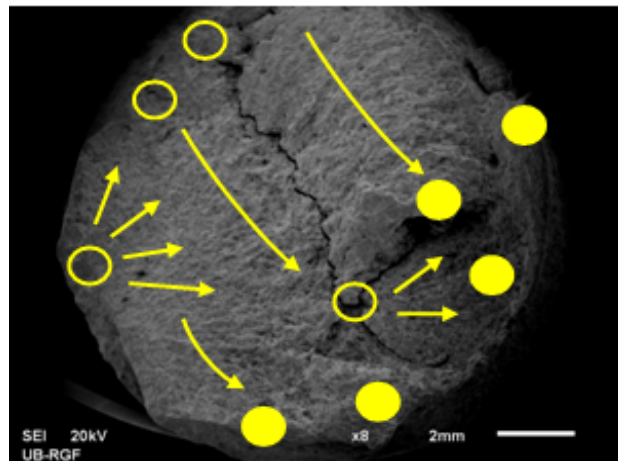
Macrofractograph of fractured surface of BB during exploitation. Secondary electron image.
